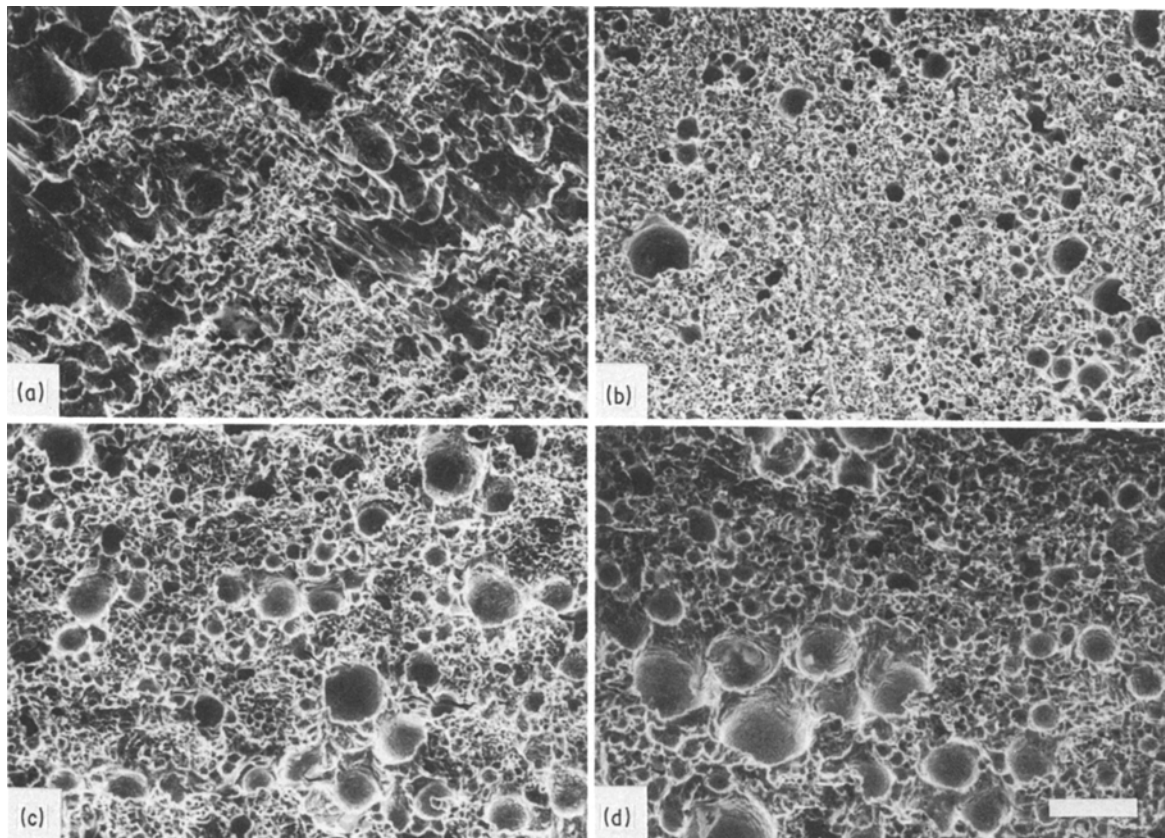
Fracture faces of brass/Sn-Pb-Sb joints soldered at 300°C for 10 min then cooled by blown air. Gap 0.17 mm. Solder containing antimony: (a) 0%, (b) 3%, (c) 5%, (d) 10%. Marker = 25 μm.
